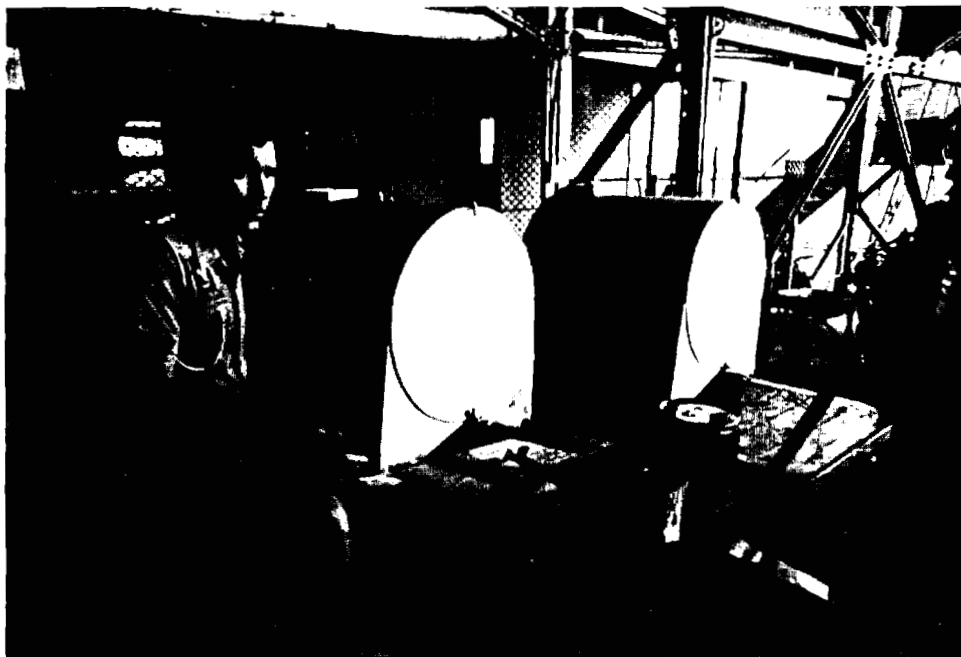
REMOVABLE "FERRY" FUEL TANKS
